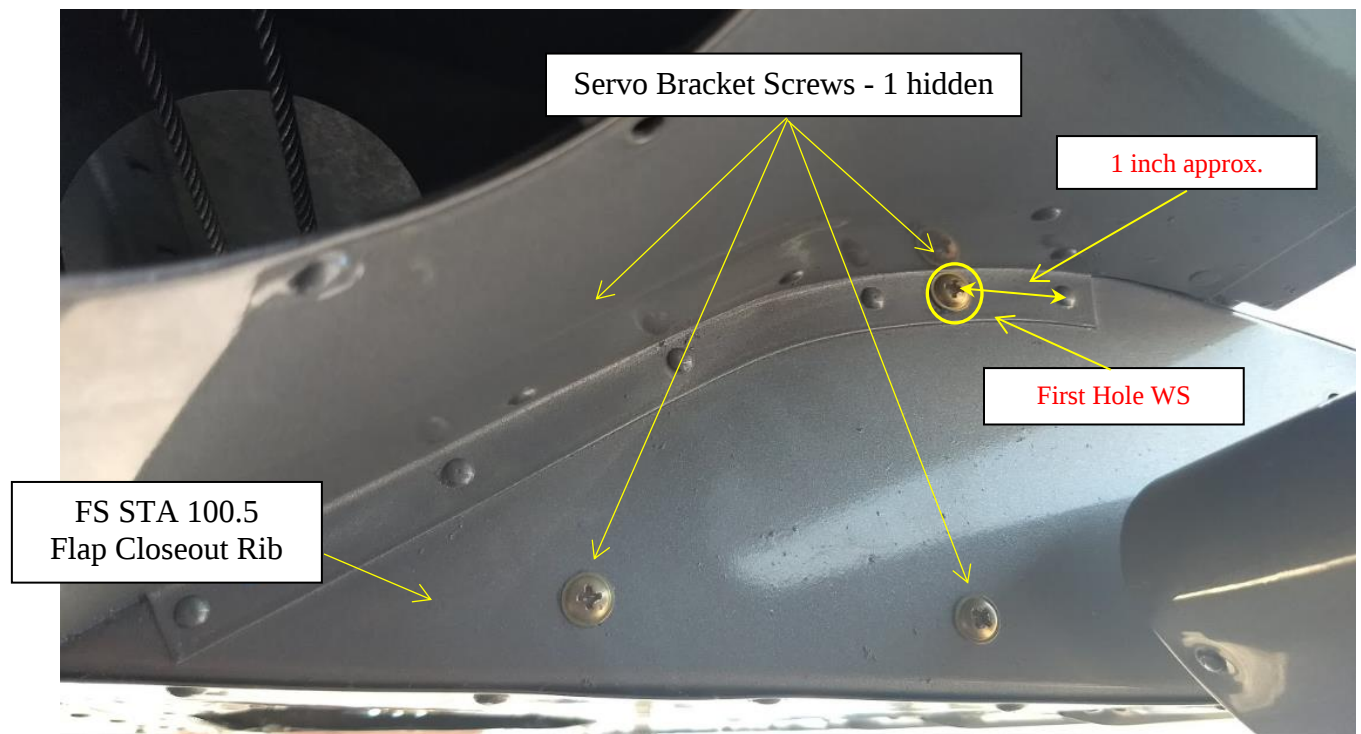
VIEW LOOKING OUTBOARD AT STA 100.5 RIB
